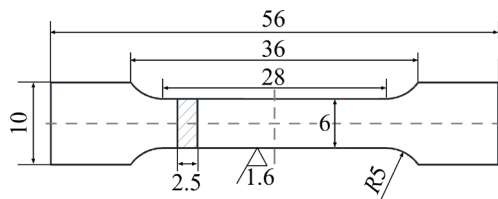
Dimensions of tensile specimens (Unit: mm)
